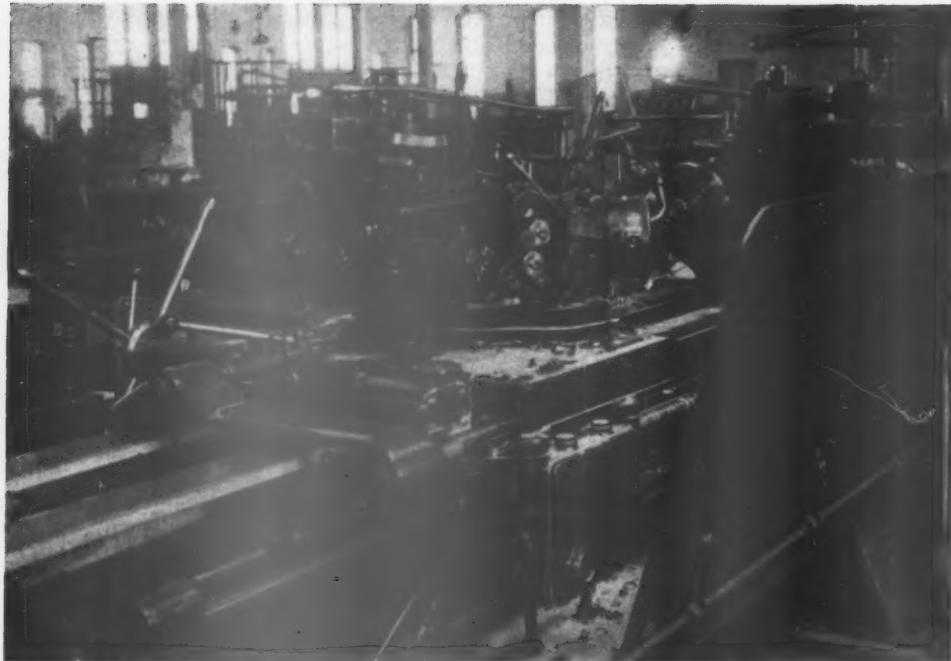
One of the new J. & L. 2½-in. turret lathes used in machining engine bolts from bar stock
